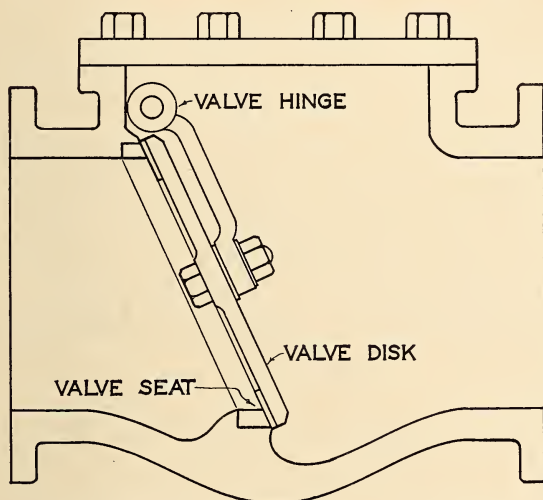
Check valve for use in long discharge pipe where the water hammer may be considerable.
